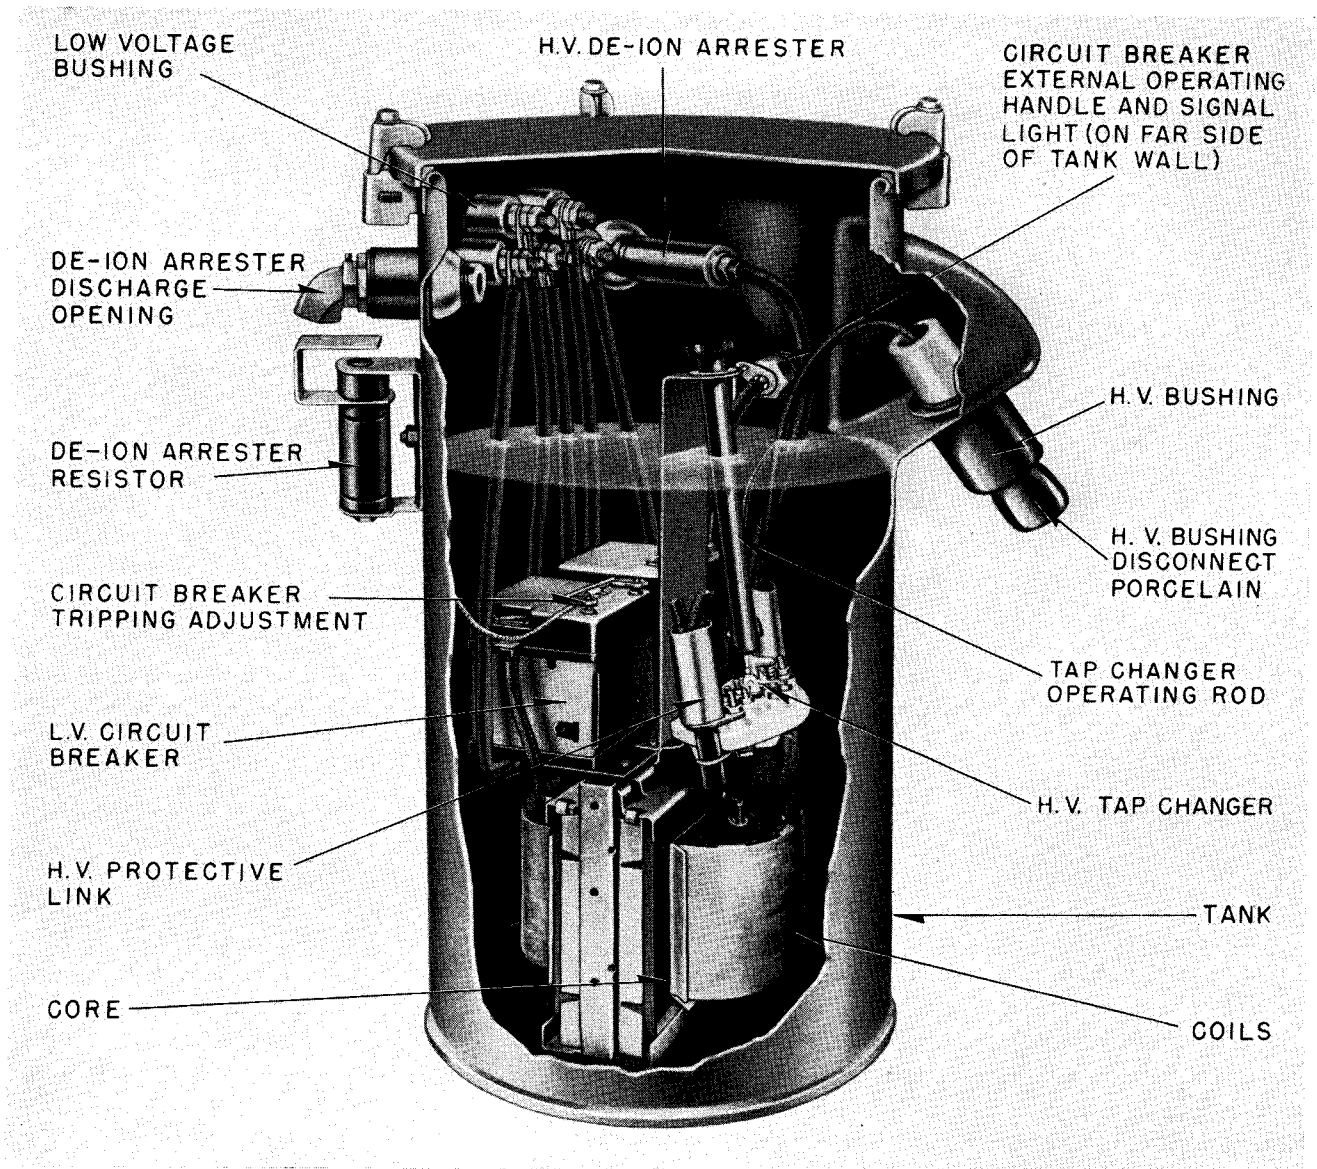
Cutaway View of Typical Single-Phase Pocket Bushing "CSPB" Transformer.
